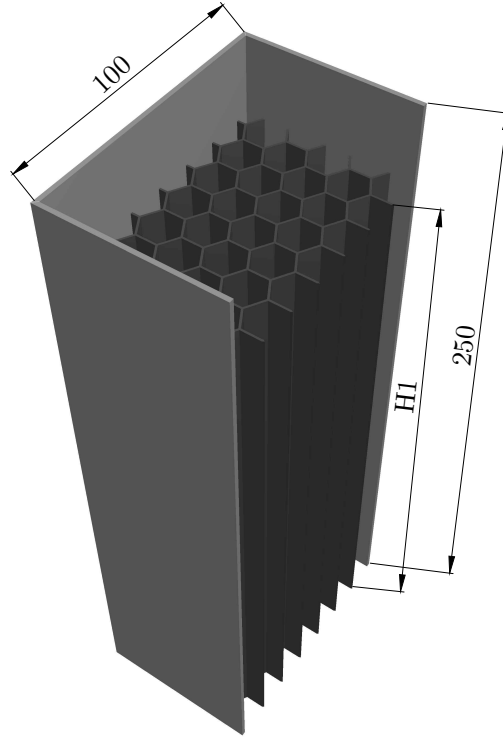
Three-dimensional cut of the specimen. All dimensions in millimeters.
